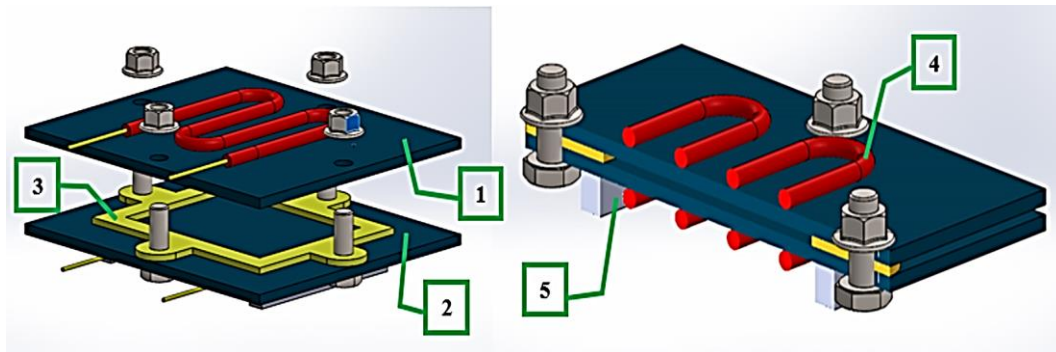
The arrangement of the die, (1) Upper plat, (2) Lower plate, (3) Spacer, (4) Heater, (5) Base support.
